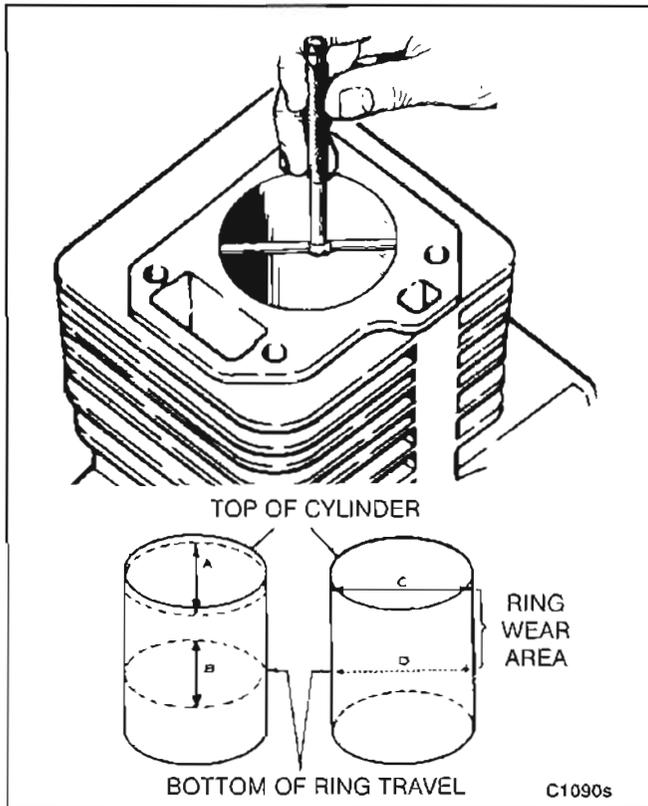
METHODS OF MEASURING THE DIAMETER OF A CYLINDER BORE
